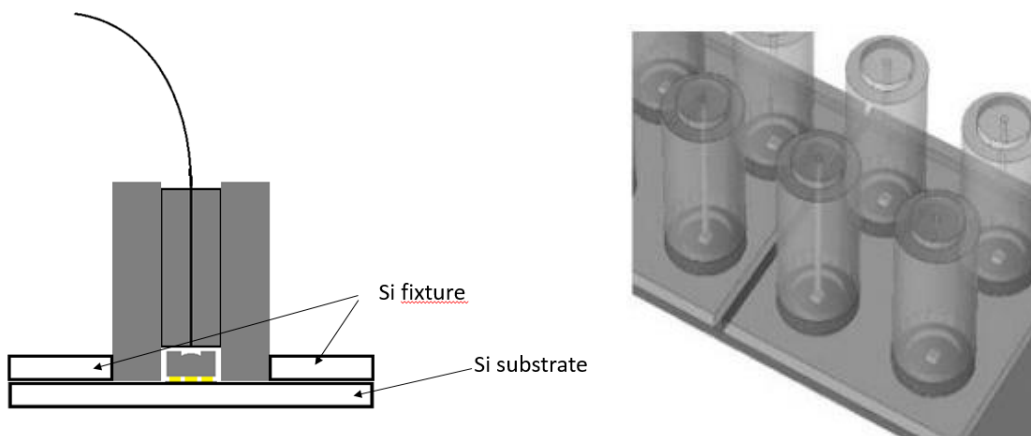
Left: Cross-section view of optical fiber assembly concept in Prototype 3. A rectangular fixture for holding alignment sleeves is made by cutting through silicon wafers. Glass alignment sleeves are inserted into circular holes, where the hole centers are aligned to the photodiode. Right: 3D view of the assembly.
